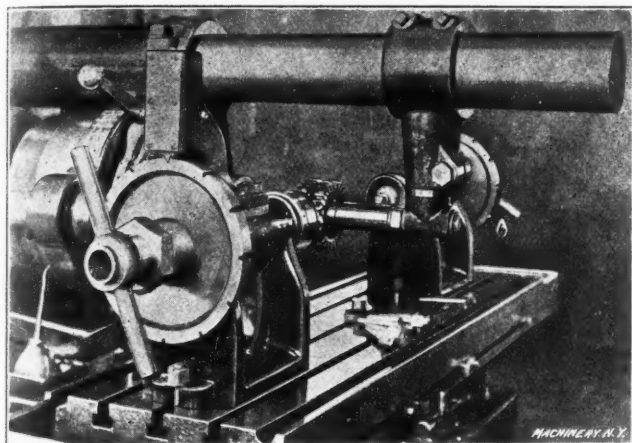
Indexing Fixtures for Milling Bolt-heads
